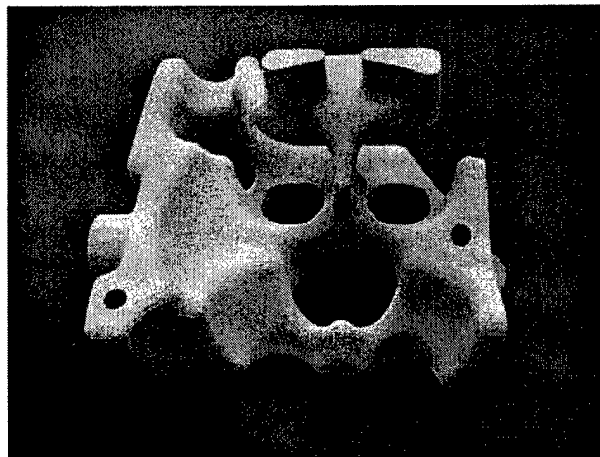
Laser sintered water jacket core of a single cylinder (ZrSiO_4)
